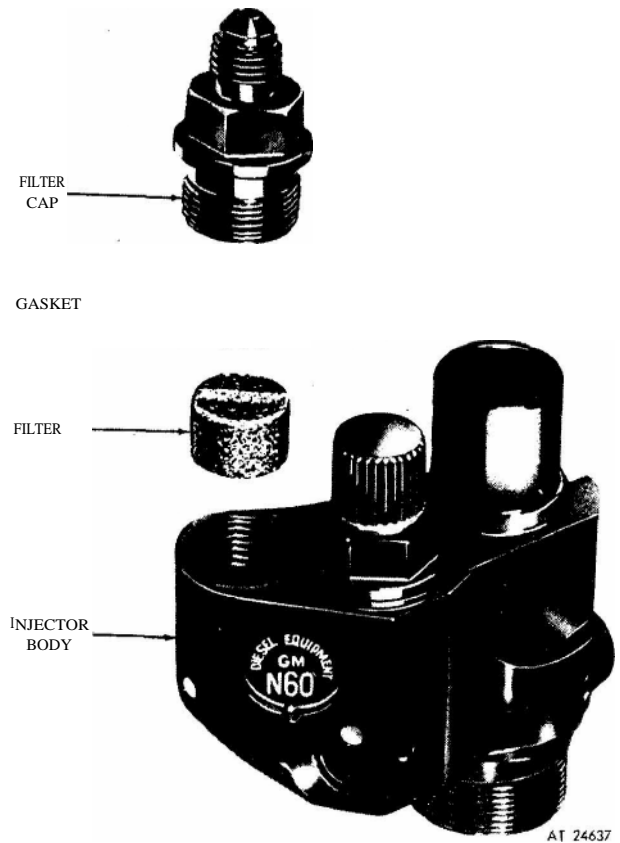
Details of injector filter and cap showing their location relative to injector body.
